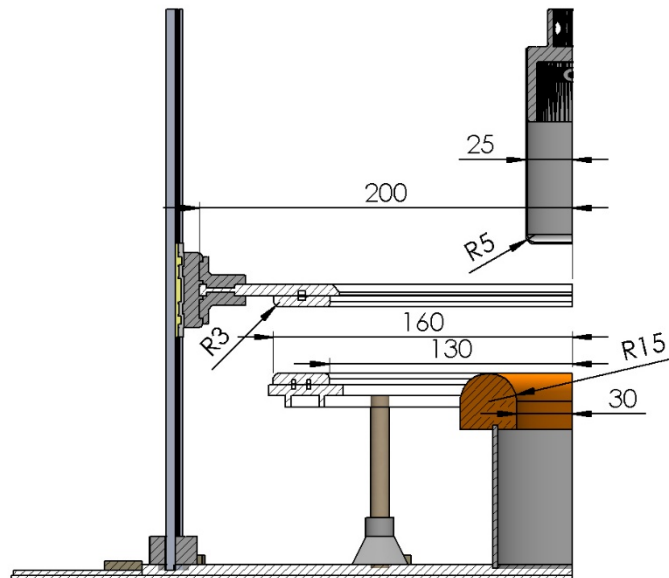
Cross-section through centre of the axisymmetric arrangement of tools (apart from the stand which sits to one side of the set-up, as shown in Figure 2), showing the male and female tools, the blank-holder arrangement and the blank-holder supporting stand (dimensions in mm).
